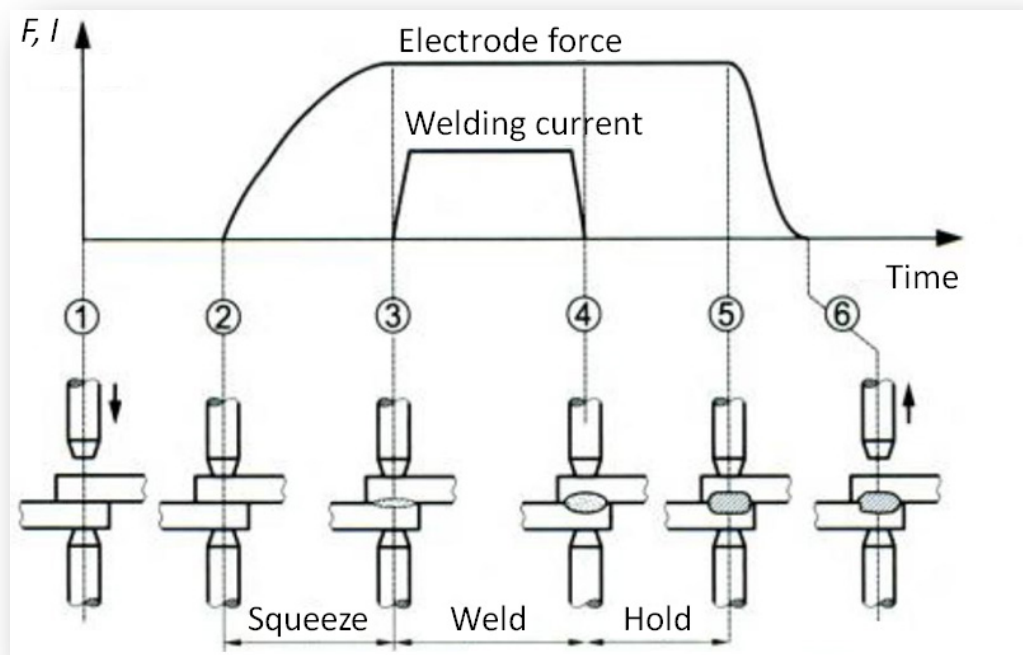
Cycle of resistance spot welding²²⁶
